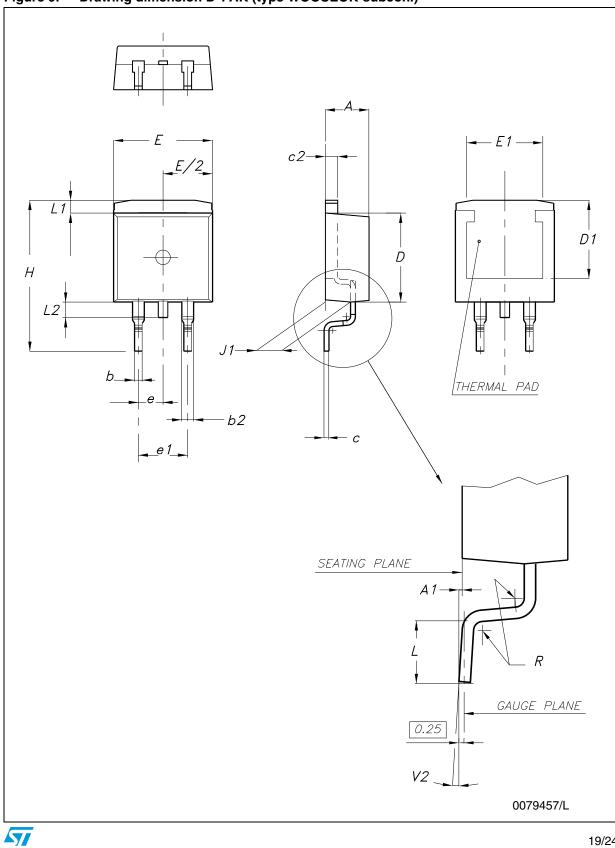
Drawing dimension D²PAK (type WOOSEOK-subcon.)
